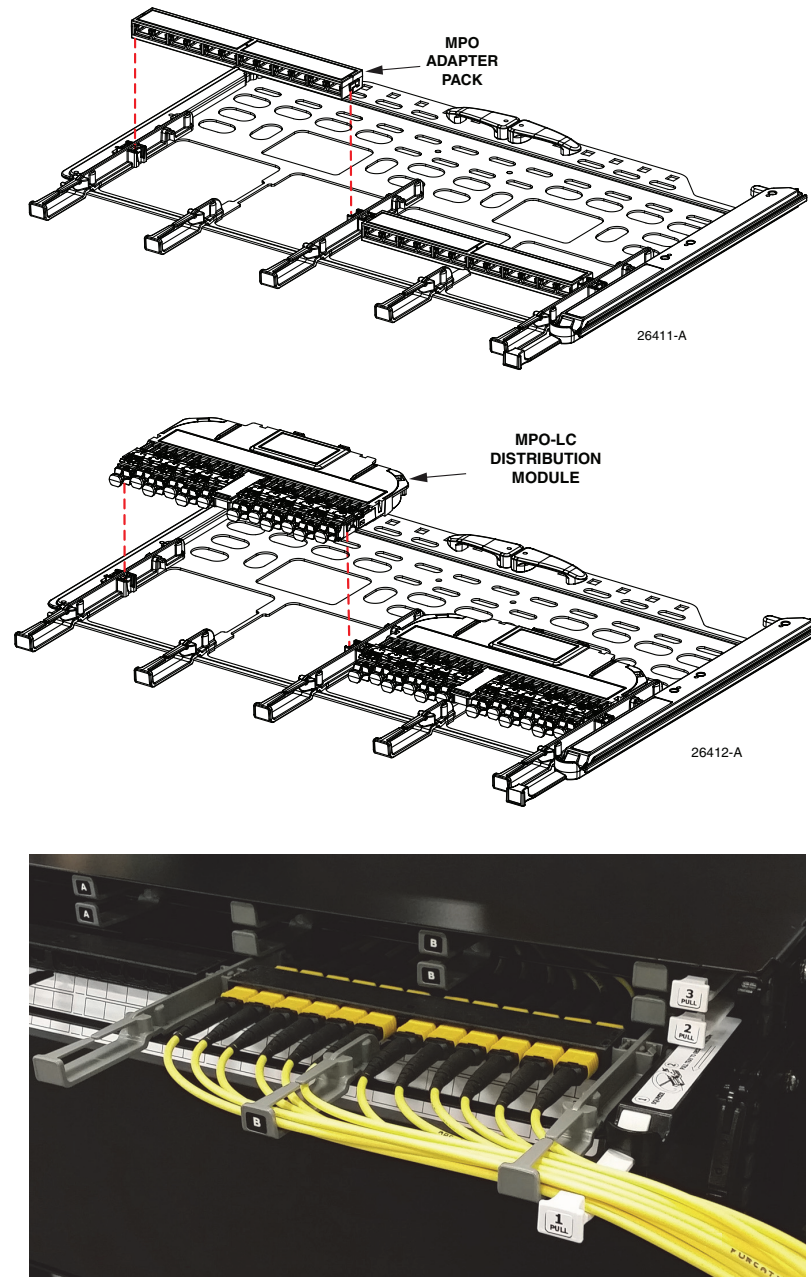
EHD Panel Adapter Packs and Front End Jumpers Example
